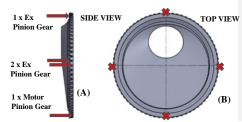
SCHEMATIC OF R PLATE FILE (A) SIDE VIEW OF PLATE, RED ARROWS INDICATING PINION GEAR SUPPORTS (B) TOP VIEW OF PLATE, RED CROSSES INDICATING WHERE GEARS SUPPORT.
